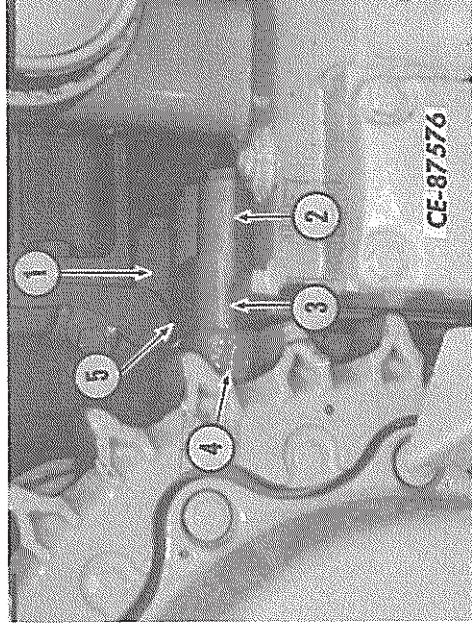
Pivot Shaft Mounting Caps (TD-15C Only)
